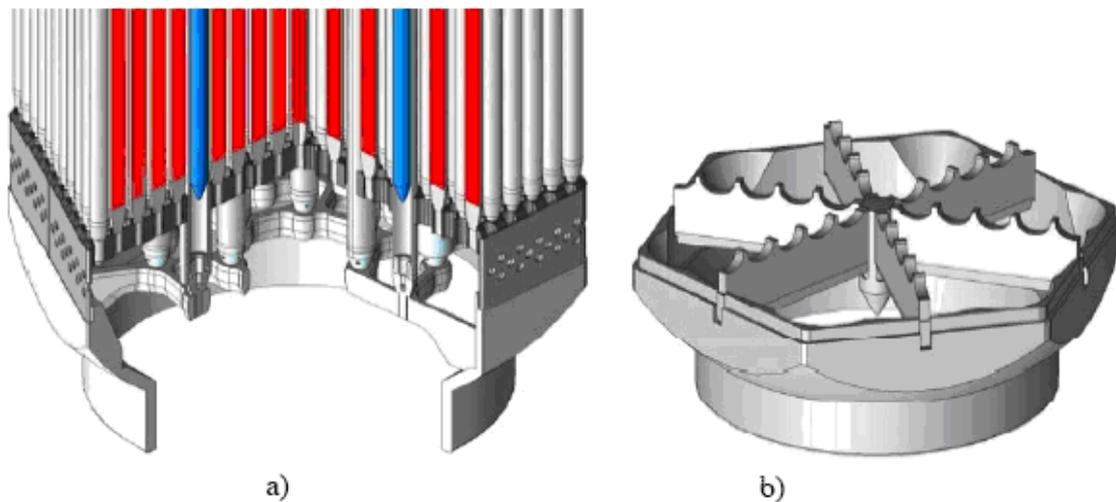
Lower nozzles of fuel assemblies: (a) – new AES-2006 design with long guide tubes (control rods are blue, red are the fuel rods); (b) – existing nozzle design (TVS-2M, bottom spacer, fuel rods and guide tubes are not shown) has no contact with guide tubes [122].
